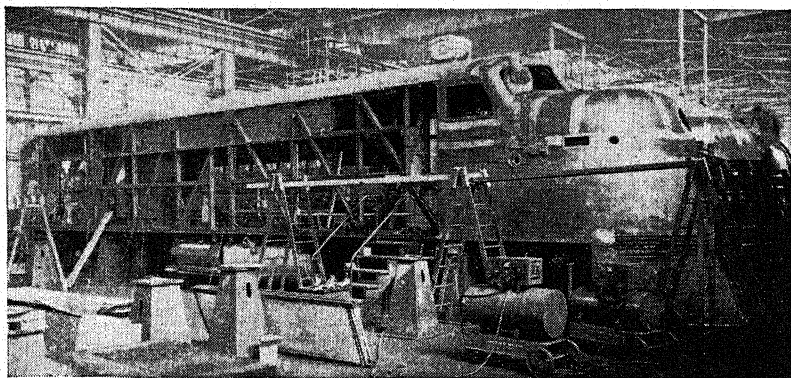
Diesel-electric streamliner—all welding completed
